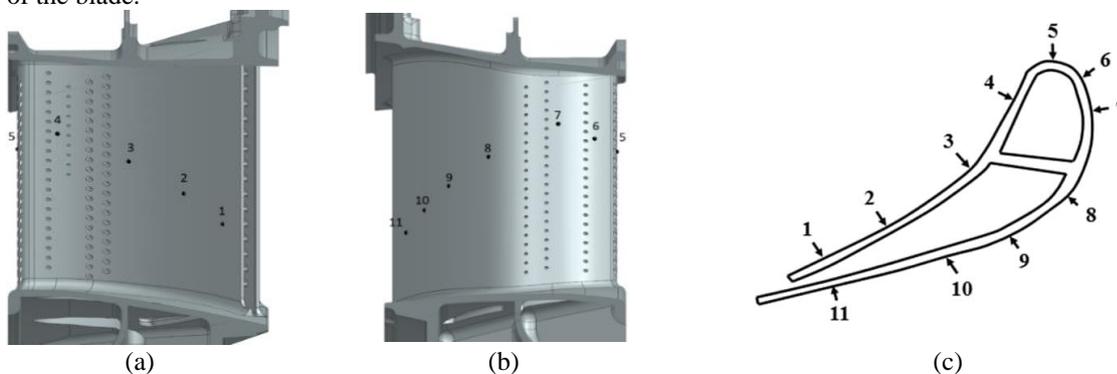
Blade views of pressure side (a) and suction side (b), with thermocouple arrangement (c)
